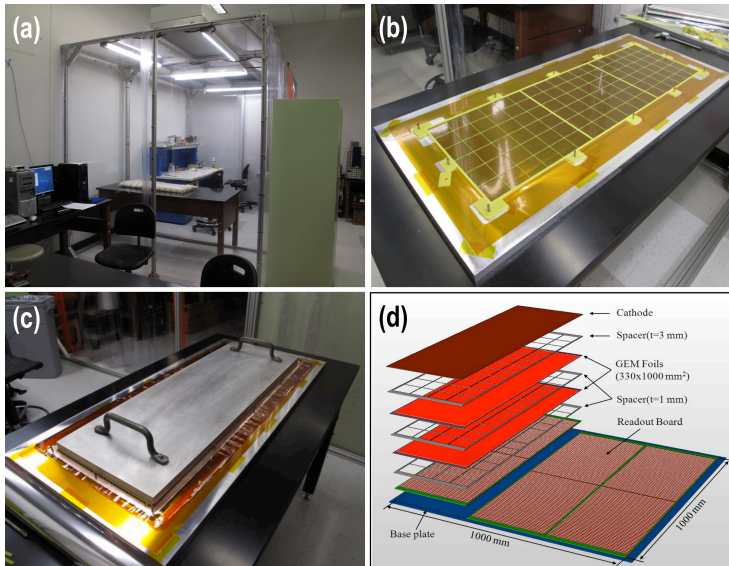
(a) 12'x8' clean room for LGEM construction (b) An LGEM layer on an assembly jig held by alignment pins throughout the sides (c) glue curing process with heavy flattening pressing plane (d) Layout of a full 100cm x 100cm GEM DHCAL active layer.
